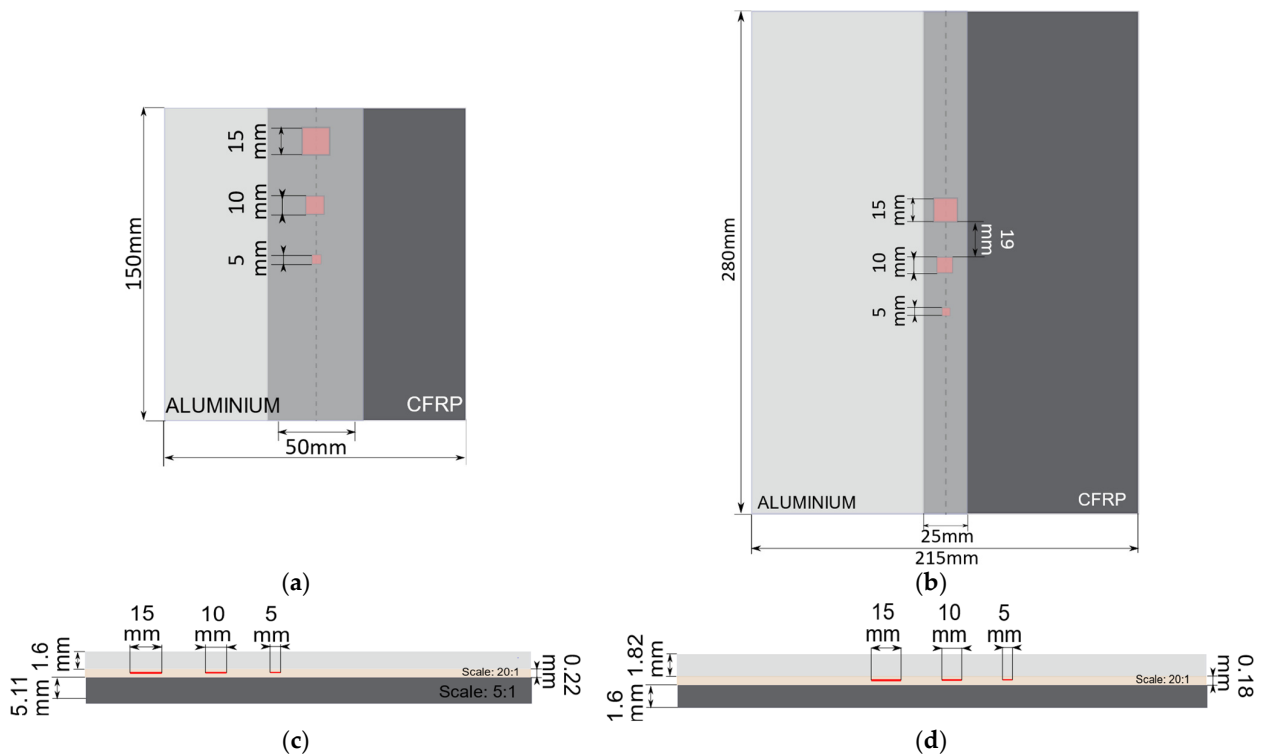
Top and side view of adhesively bonded aluminum to CFRPs. (a) Top view of Sample No.1; (b) top view of Sample No.2; (c) side view of Sample No.1; (d) side view of Sample No.2.
